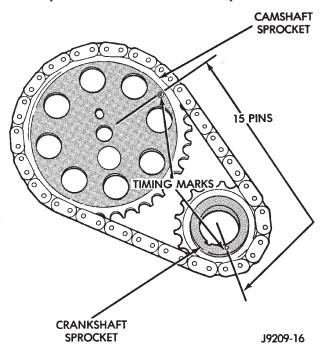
Verify Crankshaft—Camshaft Installation— Typical
